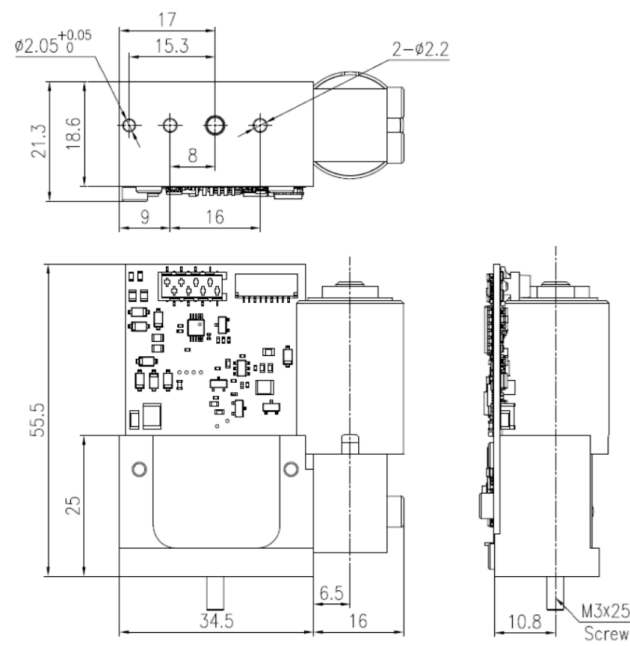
PFLOWC5001 (up to 5k sccm / 5 SLPM) manifold mechanical dimensions.
